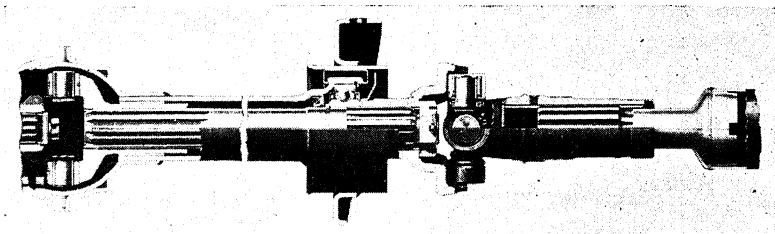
Propeller shaft and universal joints. (Chevrolet  $\frac{3}{4}$ -ton truck, 1942.)
